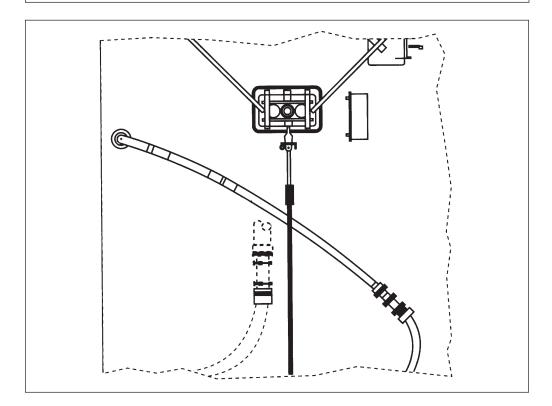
NATO "B" Arrangement Station 1 Top View
